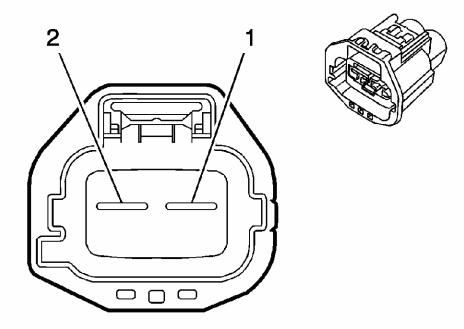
Right Cooling Fan Connector End View Courtesy of GENERAL MOTORS CORP.
